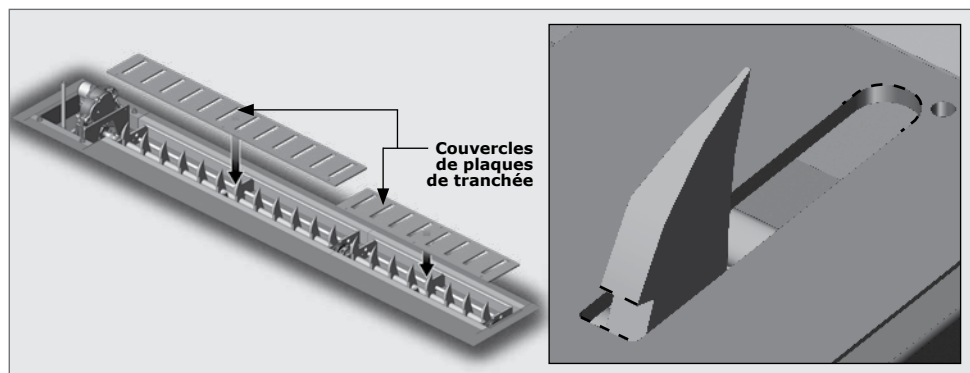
OVERVUE OF CIVIL LAYOUT
